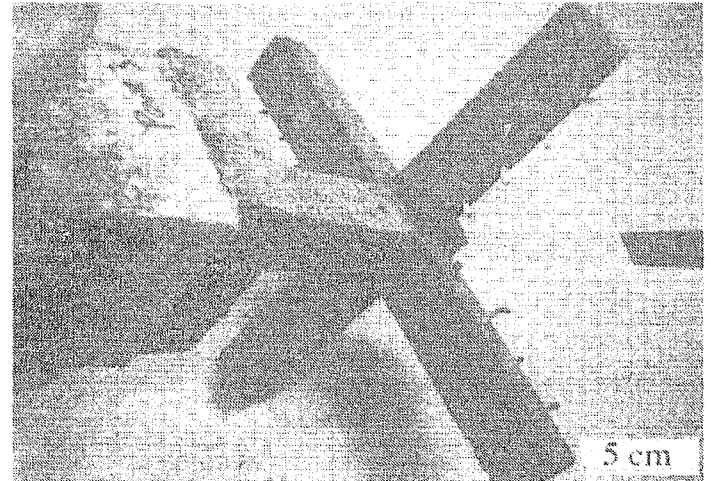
Casting: 700 °C / 1.6 pcf / with vacuum, top side.
